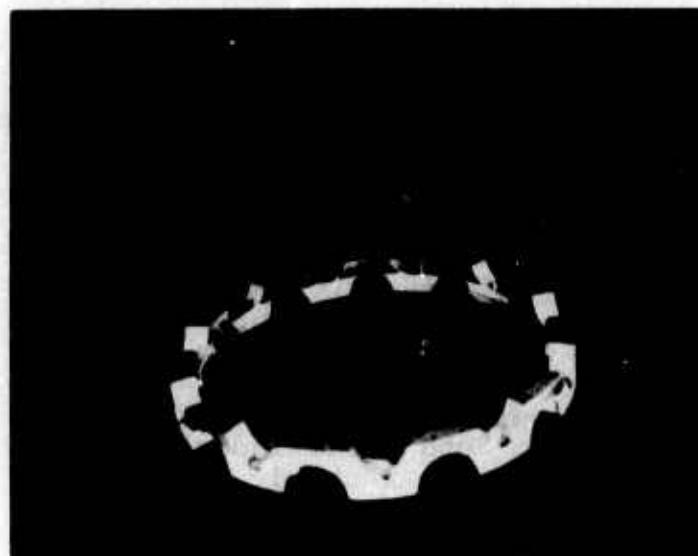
One-Half of Cage From Bearing S/N 4 After Test, Showing Wear.
